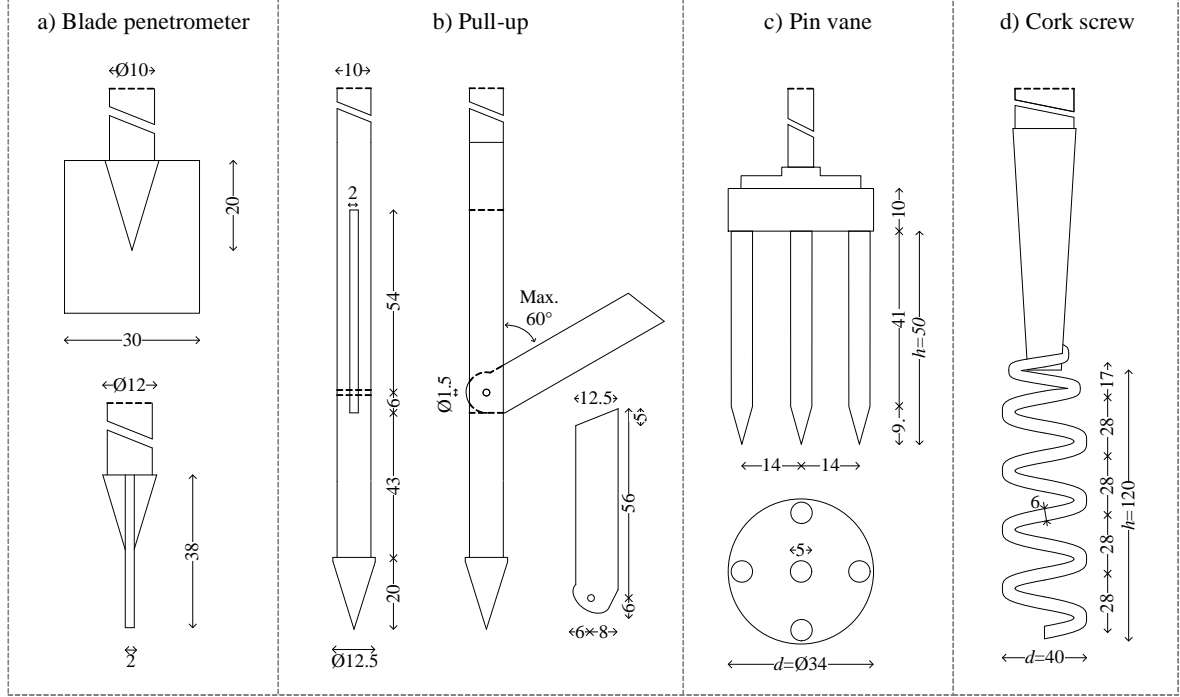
Technical drawings of the four devices: (a) blade penetrometer; (b) pull-up; (c) pin vane; (d) corkscrew. All dimensions are in mm
